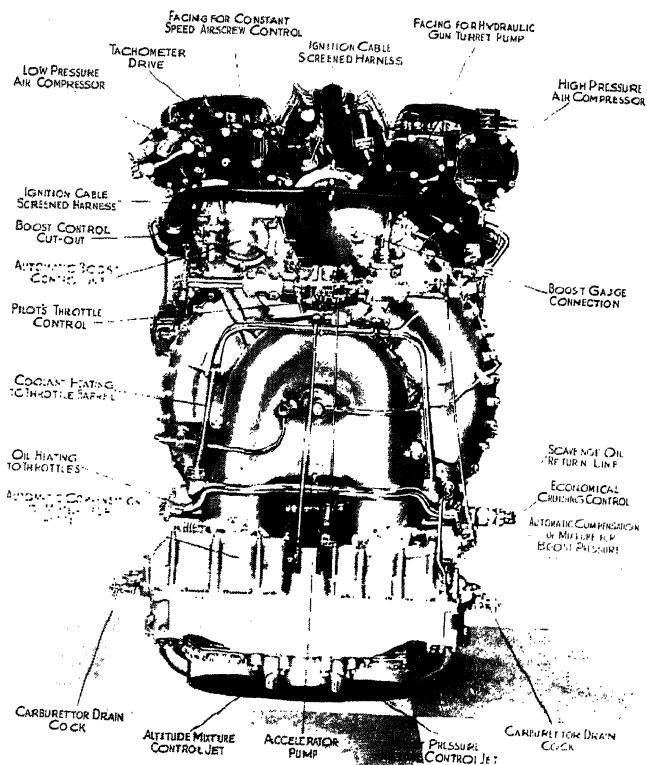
Rear end view of Rolls Royce "Merlin" engine showing principal components.
